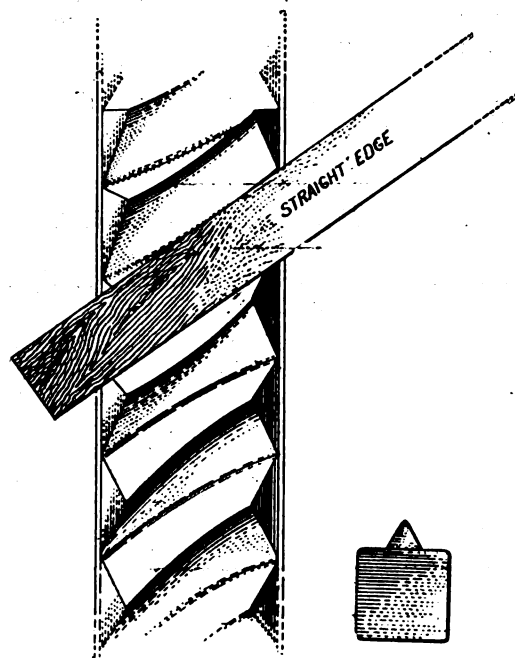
Showing a form of worm wheel with a straight edge set on the face of a tooth, showing the concave form of the latter.
